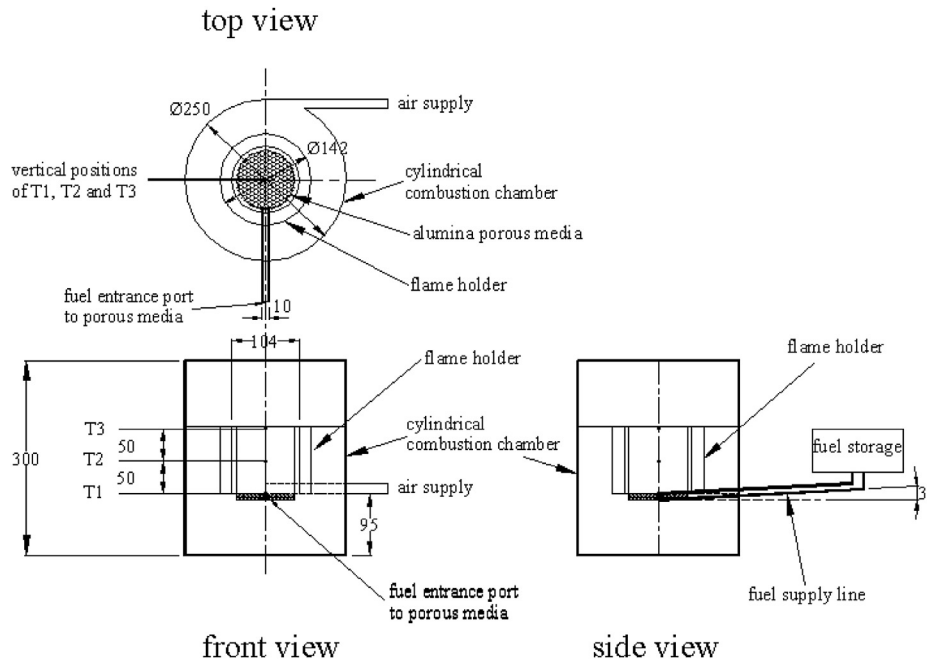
Detail layout of the combustion chamber (all dimensions are in mm).
